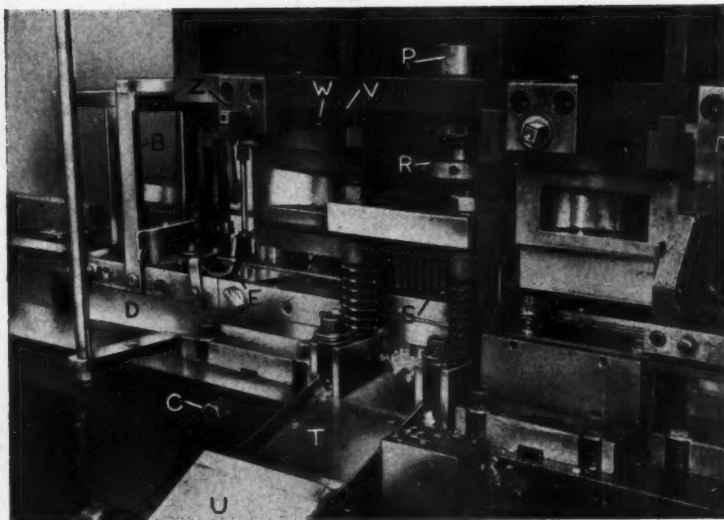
Close-up view of the multi-stage press tool, showing the units for the stamping, piercing, and first-forming stages. The piercing tool is mounted in a separate die-set, since it has a shorter stroke than the other units
